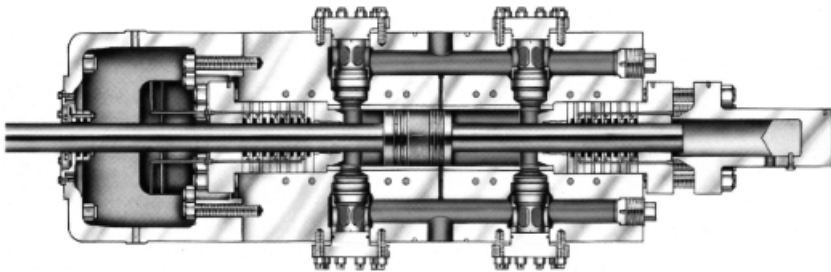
Forged steel cylinder with a tailrod design for pressures to 7500 psi. Tailrod construction is used to pressure-balance a piston or to achieve rod load reversals. This load reversal may be needed to properly lubricate the crosshead pin bearing. (*Dresser-Rand Company, Painted Post, N.Y.*)
